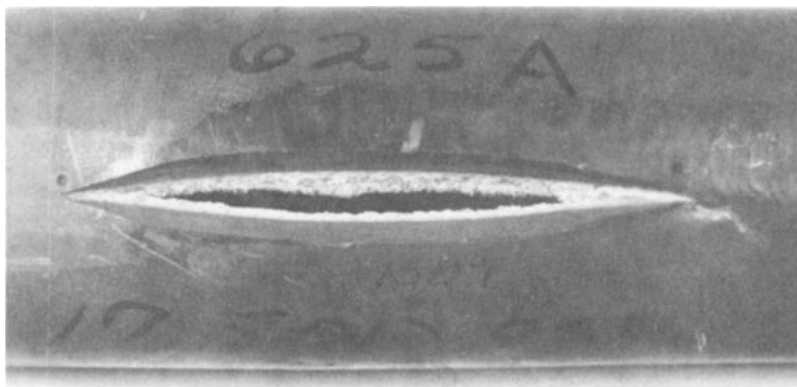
Welded Specimen Y-1*, tested at 65°C, showing ductile shear in the notch and 1-cm brittle fracture extending from the end of the notch in the HAZ into the base metal.
